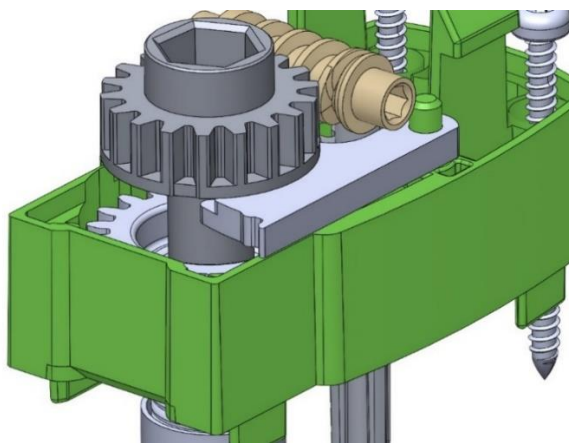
Upper head-box head assembly with safety lever closed.
